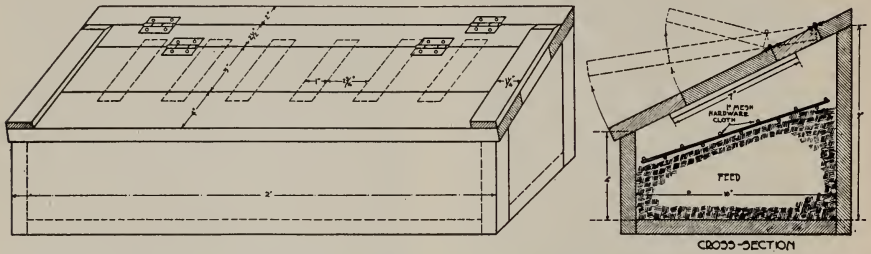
Working plan for dry mash hopper shown in figure 77. (From Cir. 268.)
